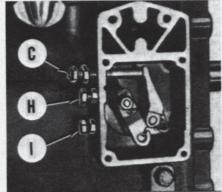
Turn screw (I) to adjust low idle speed and screw (H) to adjust high idle speed. Torque control screw (C) must be adjusted as outlined in
